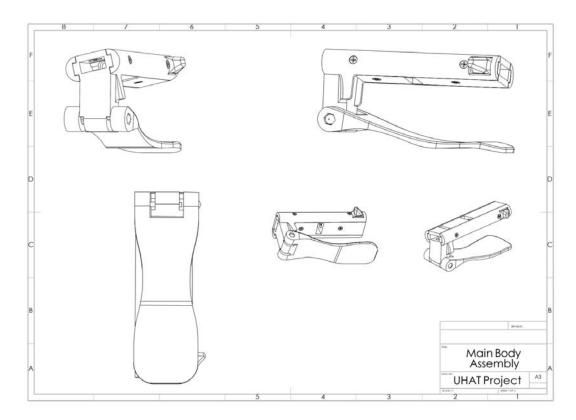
Engineering drawing of the main body assembly of the UHAT.
